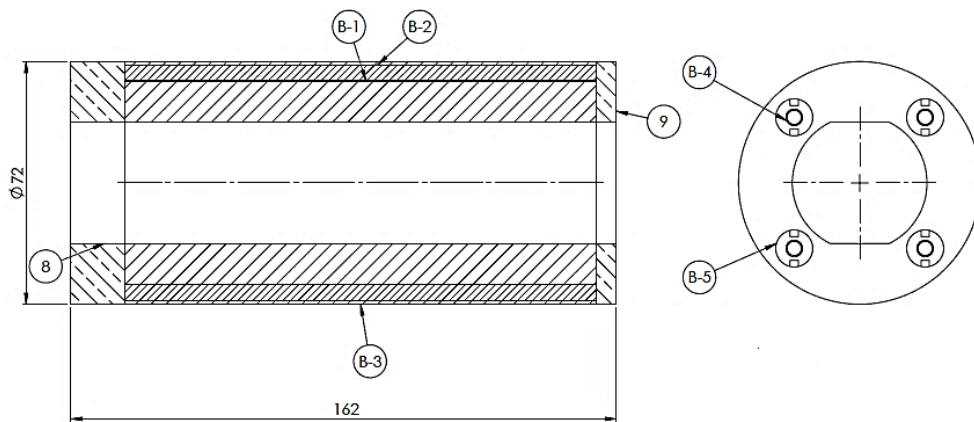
Rotor Assembly of the Surface mounted HSPM Generator
